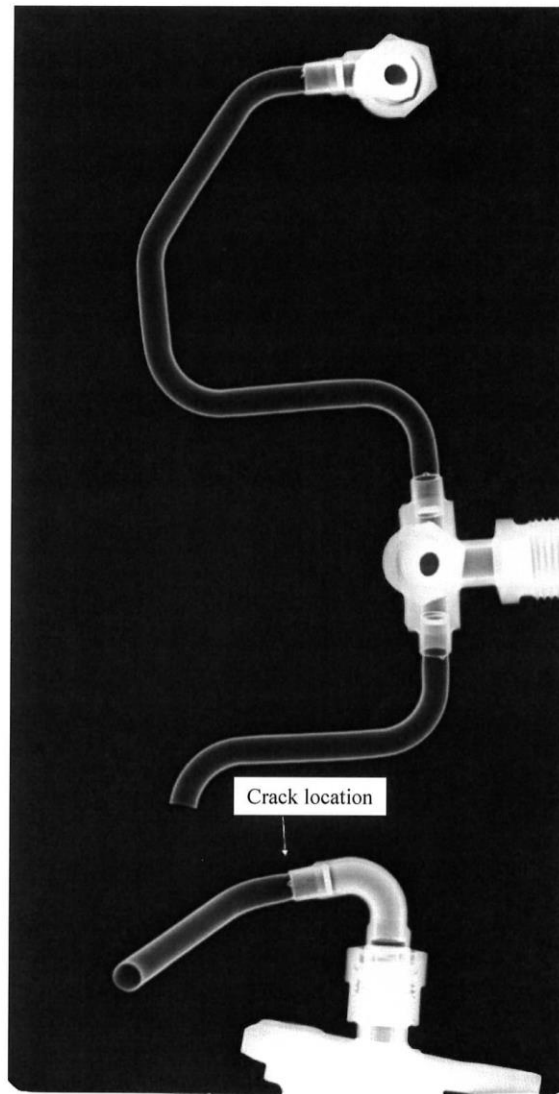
X-ray image of manifold showing location of crack and appearance of braze joints.
